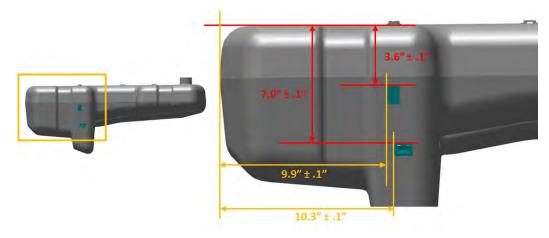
CABLE TIE ANCHOR MOUNT EXTERIOR LOCATIONS 6&7
